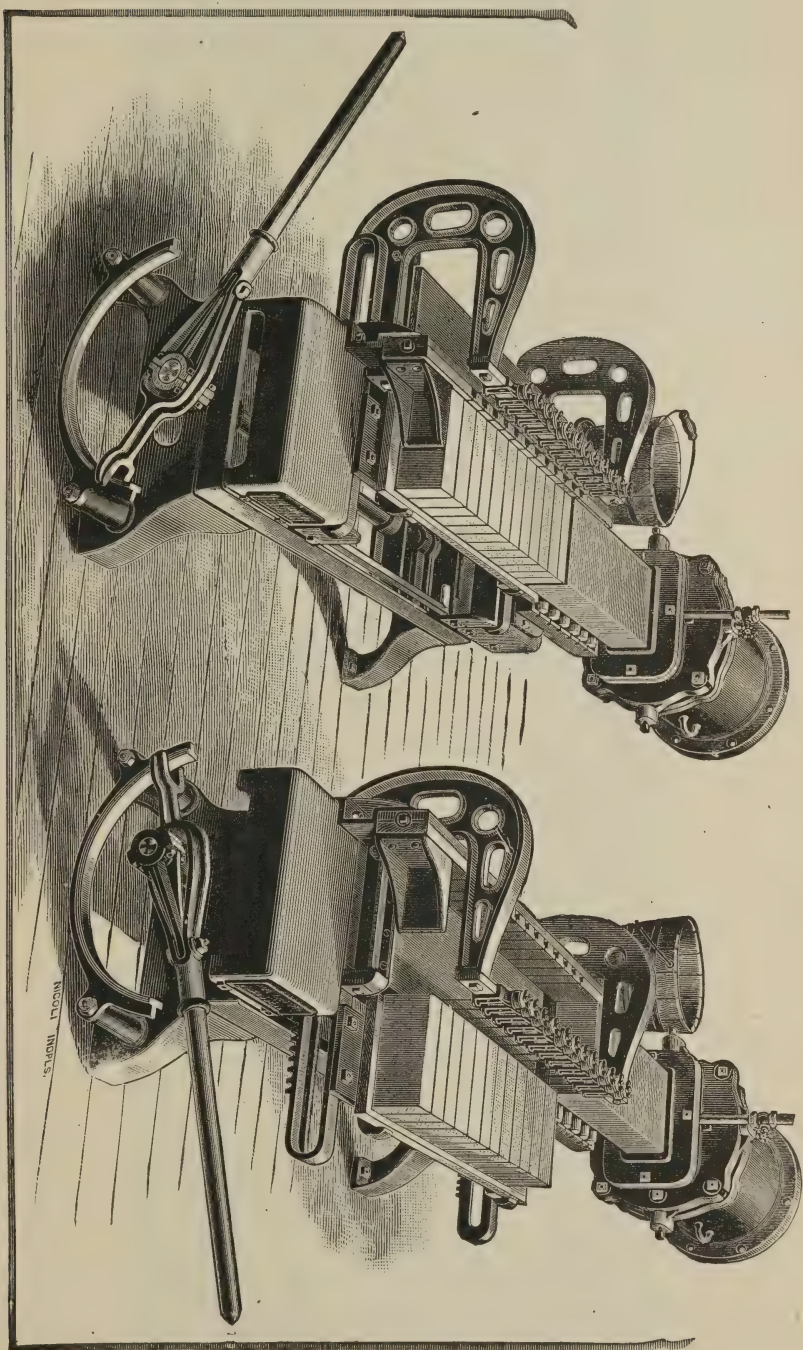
Two views, hand-cutting, stiff-mud, improved pattern, board delivery brick molding machine.
